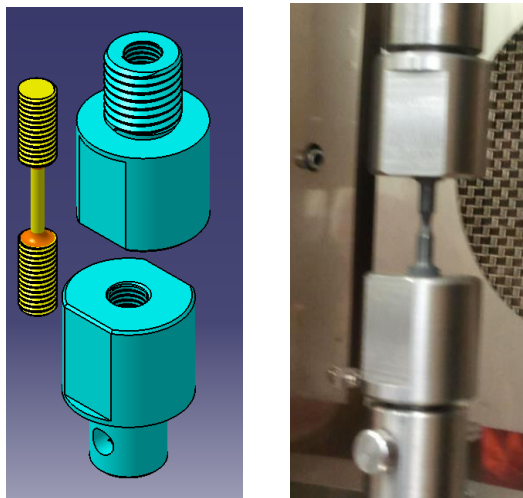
Positions of the specimens, upper grip, and bottom grip.
